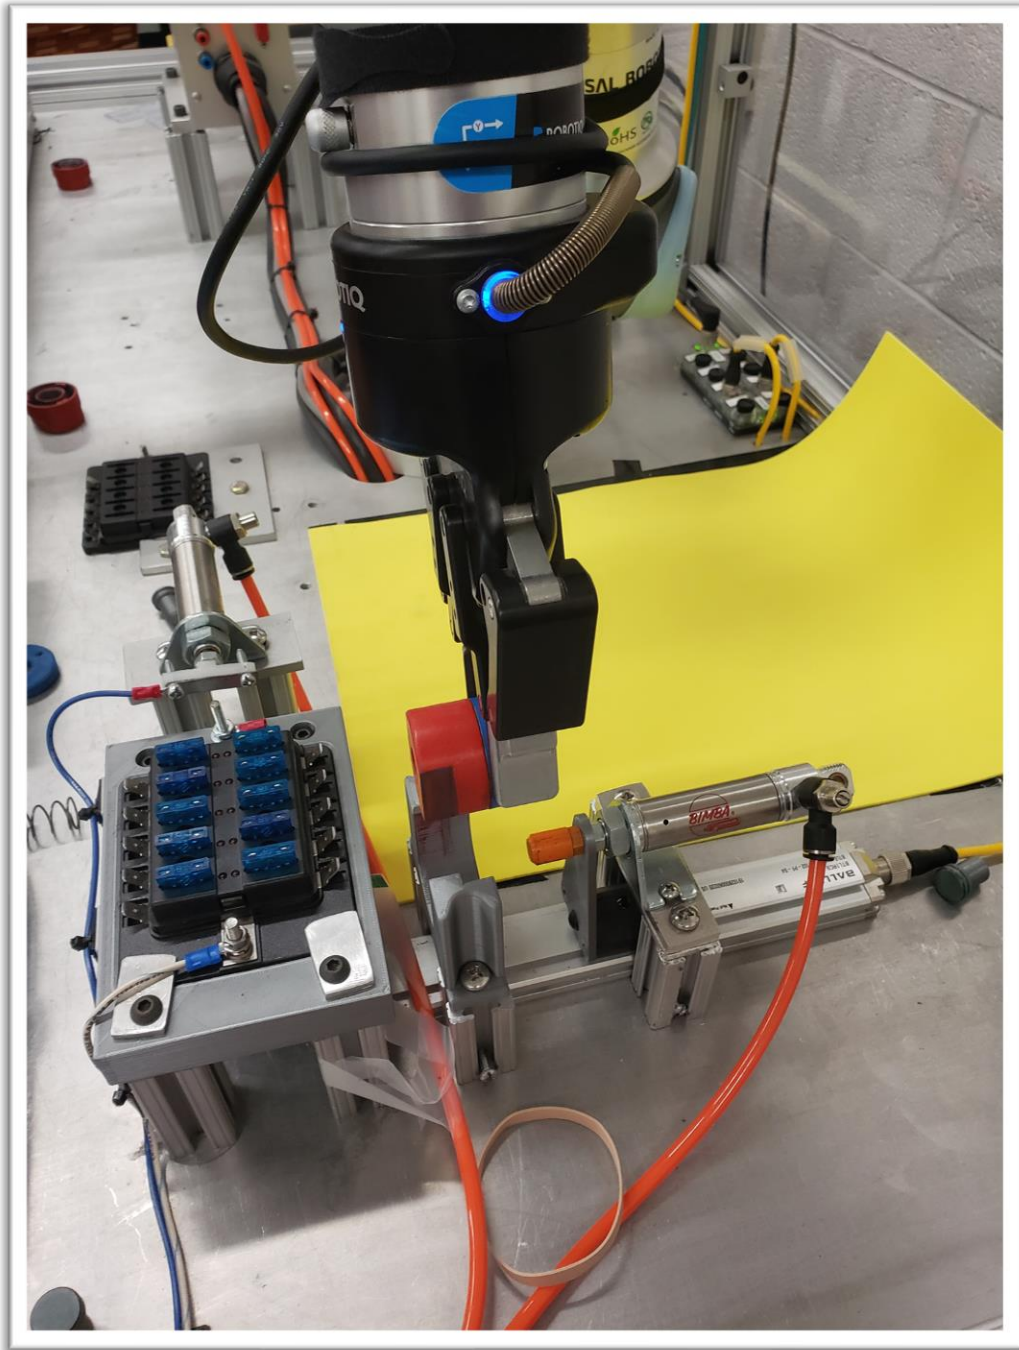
Robotic arm transferring assembly to quality test fixture
